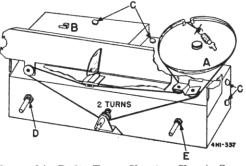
Radio Tuner Showing Chassis Cover and Dial Assembly.
